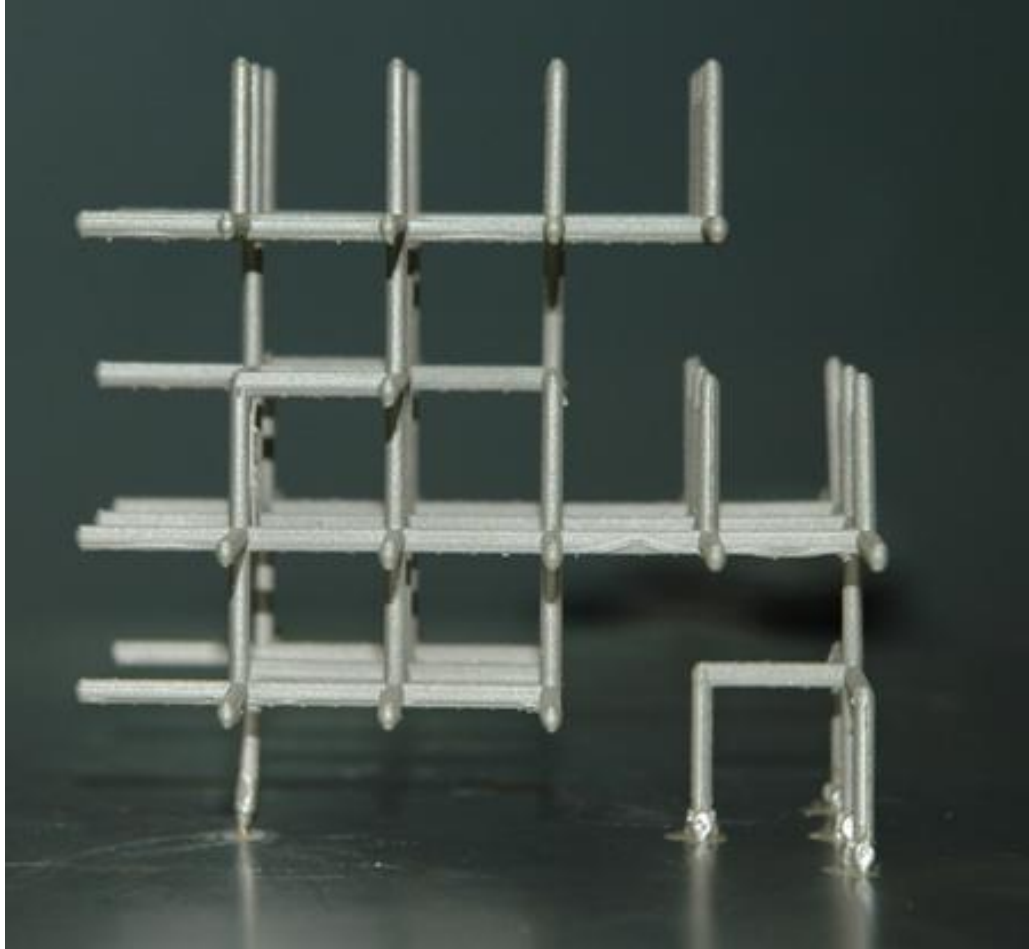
First Three Dimensional Design Coated With Silver Paint
